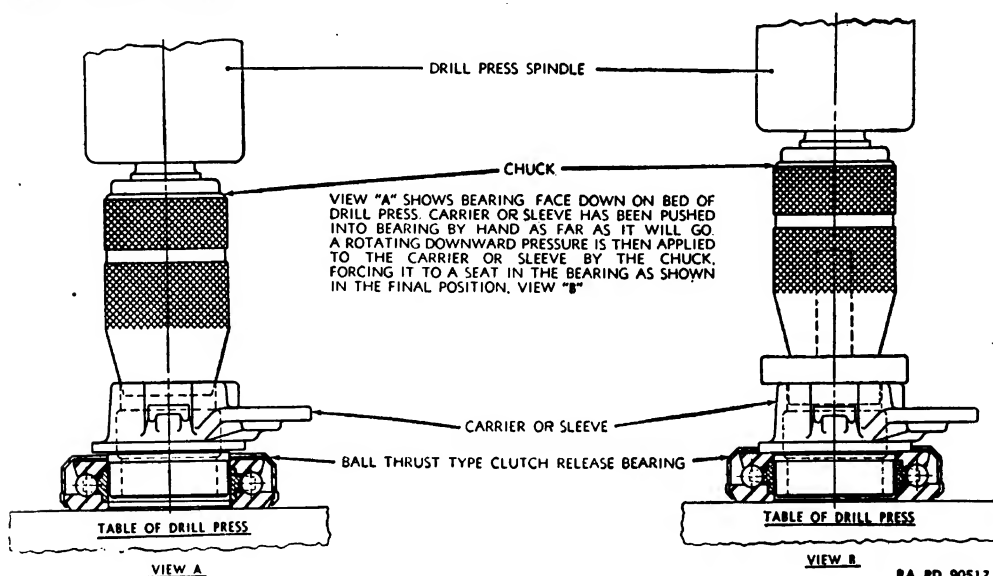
Assembling ball thrust clutch release bearings on carriers or sleeves.
